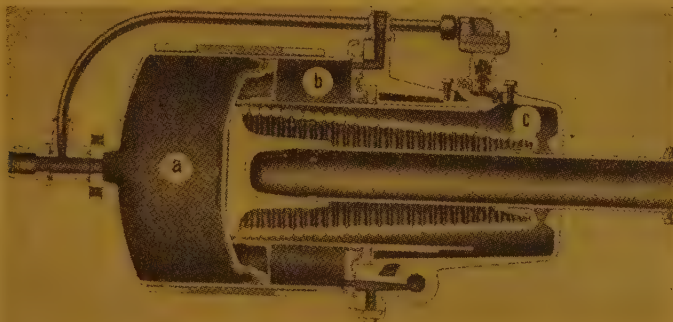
The brake-cylinder body showing the 12-in. piston chamber *a*; the chamber *b* around the hollow rod; and the chamber *c* inside the hollow rod.
